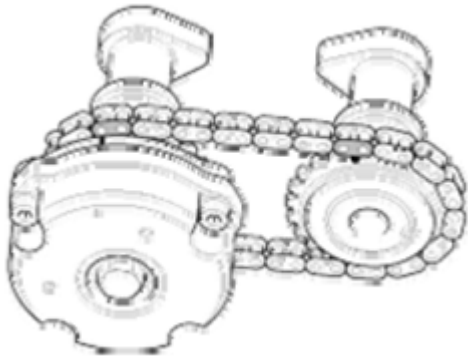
Aligning Camshaft Timing Chain With Intake Timing Chain Sprocket & Exhaust Timing Chain Sprocket
